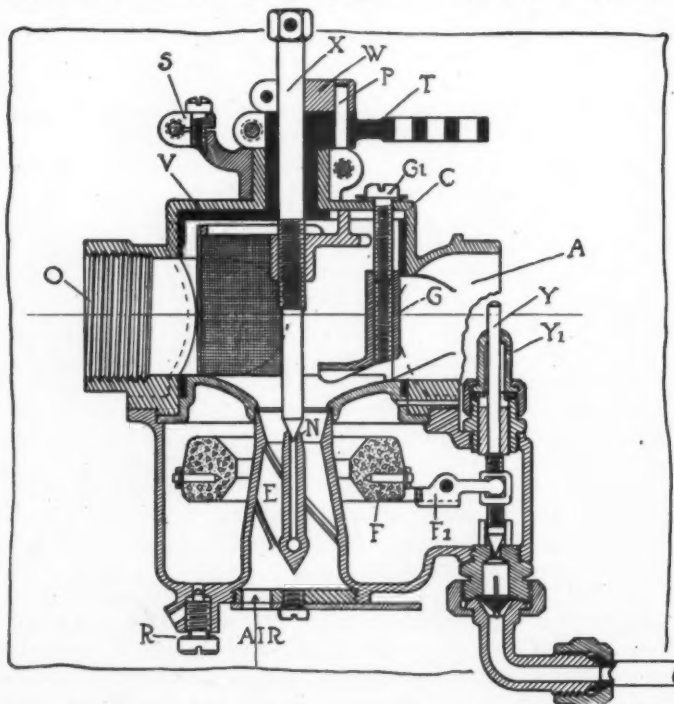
E. C. B. carburetor with sleeve type of throttle
